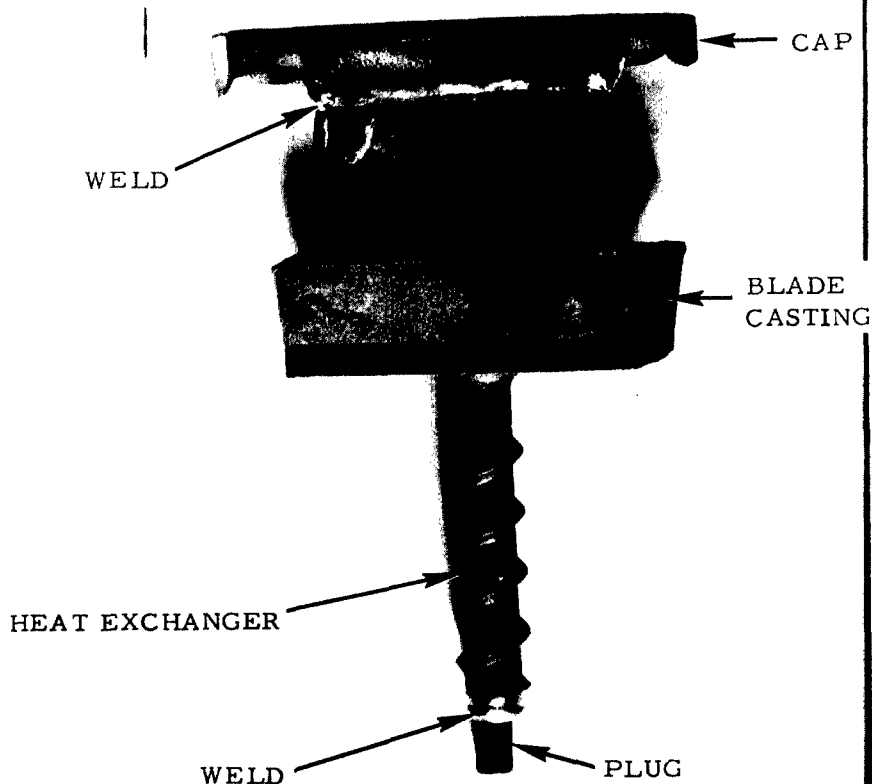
Fluid-Cooled Blade, Welded Assembly.
